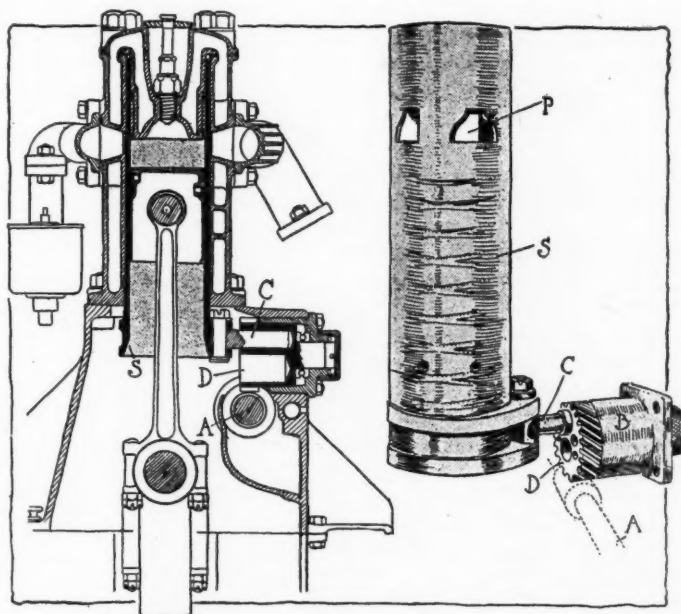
Left—Section through Argyll single-sleeve motor. Fig. 2—Right—Sleeve and driving mechanism
